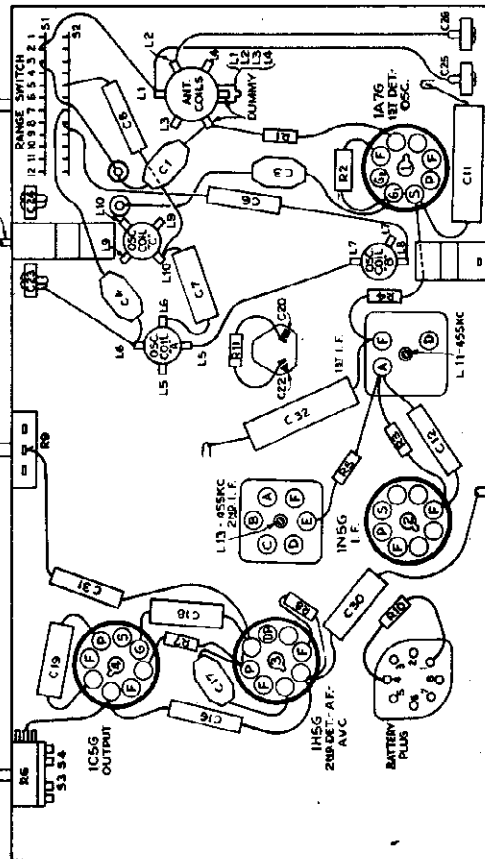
TUBE, TRIMMER AND PARTS LOCATION—BOTTOM VIEW
